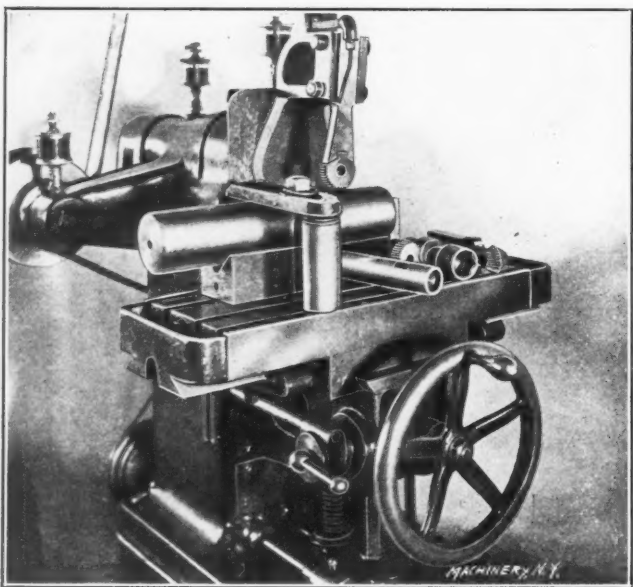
Cutting a Slot with the Oscillating Milling Machine.
